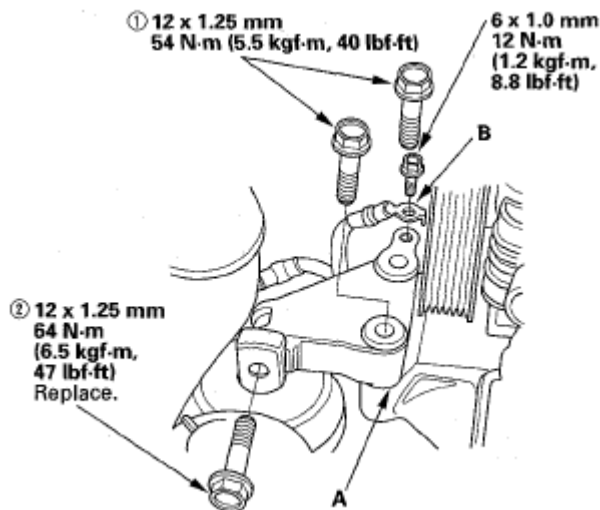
Identifying Engine Mount Bracket Bolts With Torque Specifications
